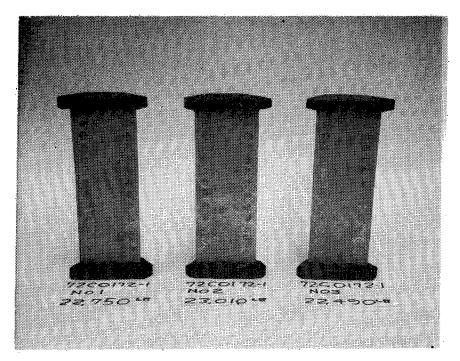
Failed Spotwelded Crippling Specimens Skin Side (Neg. 126987B)
